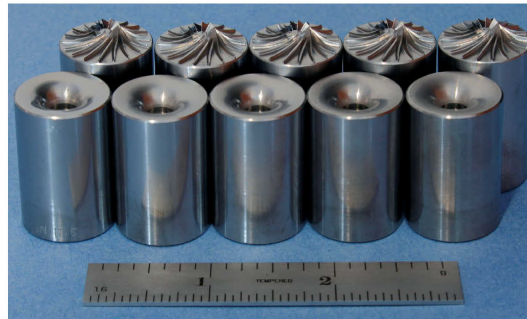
Advanced geometry compressor impeller components after machining prior to diffusion bonding.
